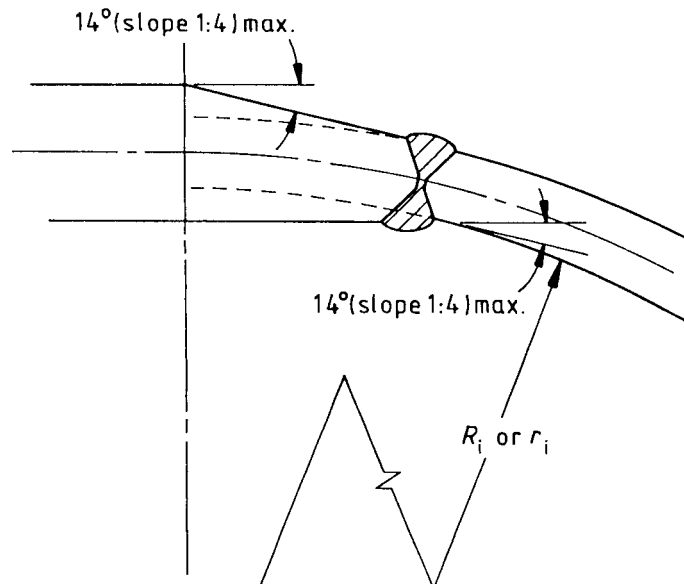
Angular alignment of butt welded tubes
